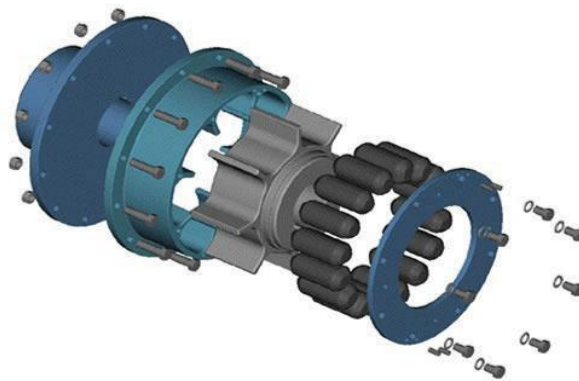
elastomeric damper type soft coupling (Courtesy Renold Hi-tech coupling)
